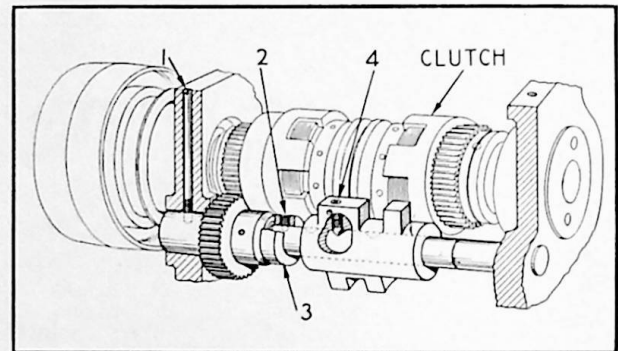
Idler Shaft for No. 2 A. G. H. Turret Lathe.
